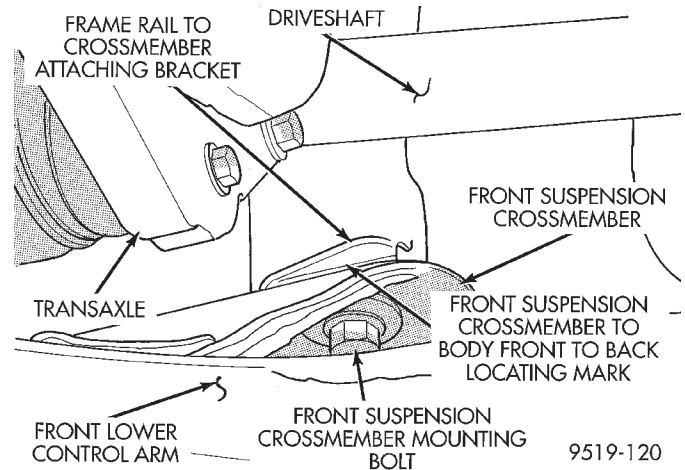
Front Suspension Crossmember Front To Back Locating Mark (Left Side Front)
